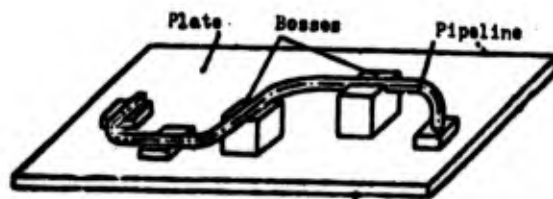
Mold loft for checking the configuration of the pipeline.
